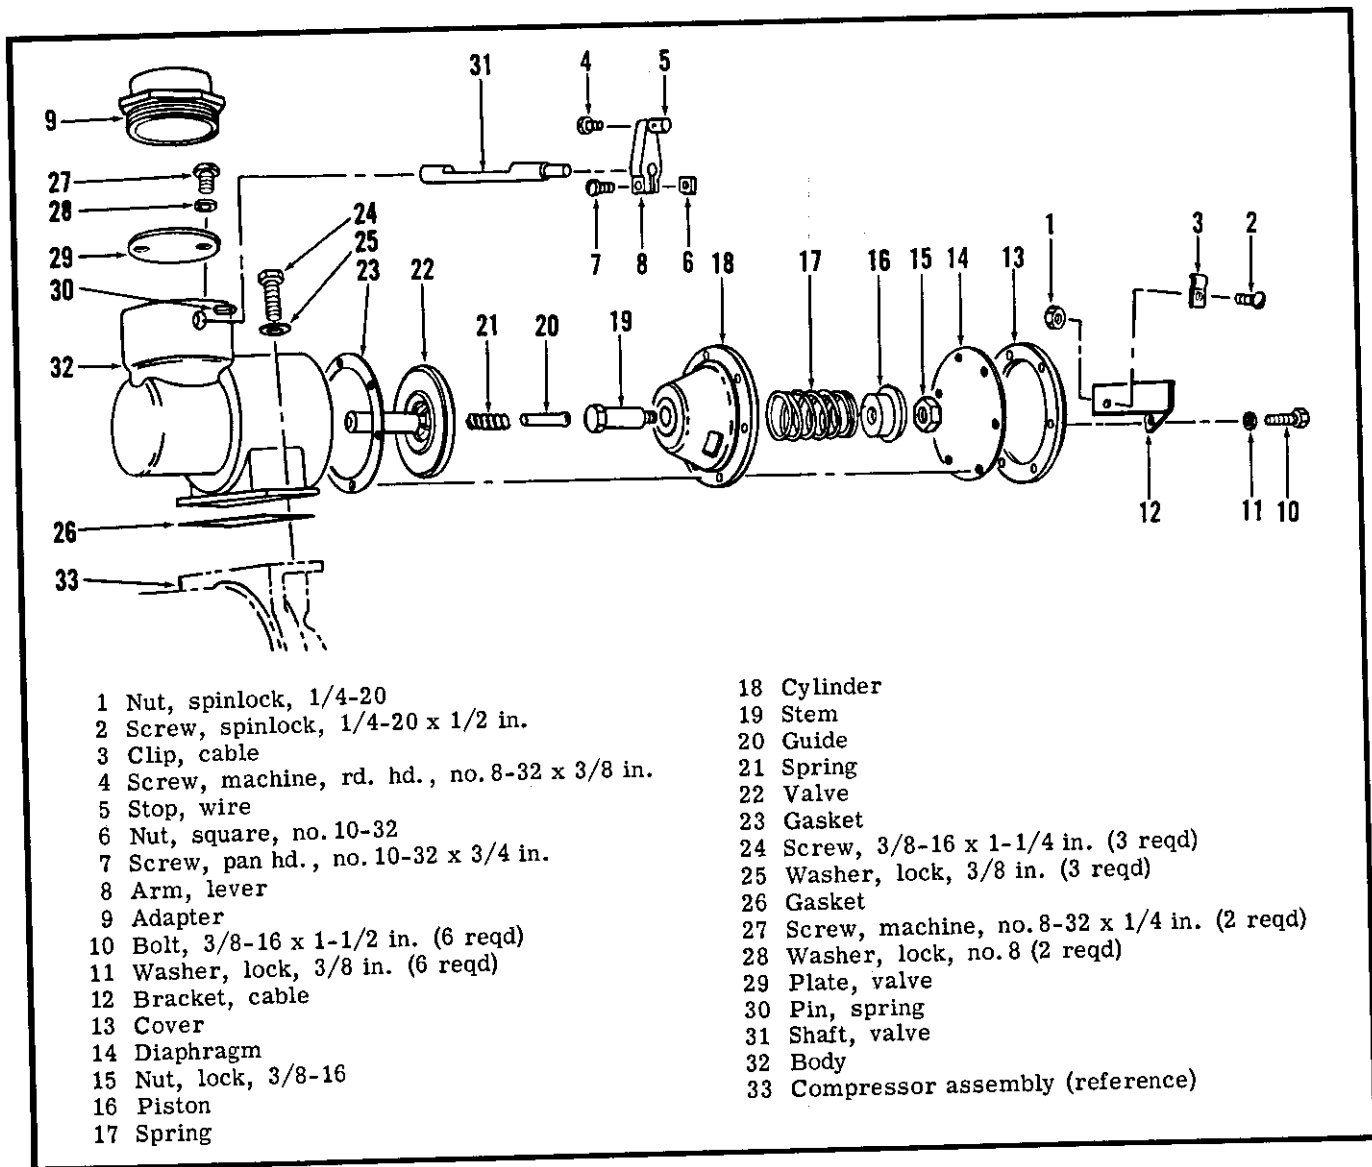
Air Intake-Unloader Assembly, Disassembly and Reassembly
